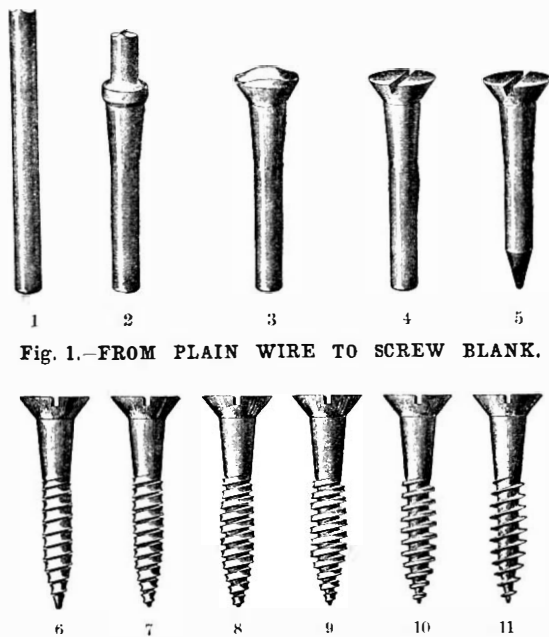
FROM PLAIN WIRE TO SCREW BLANK.
